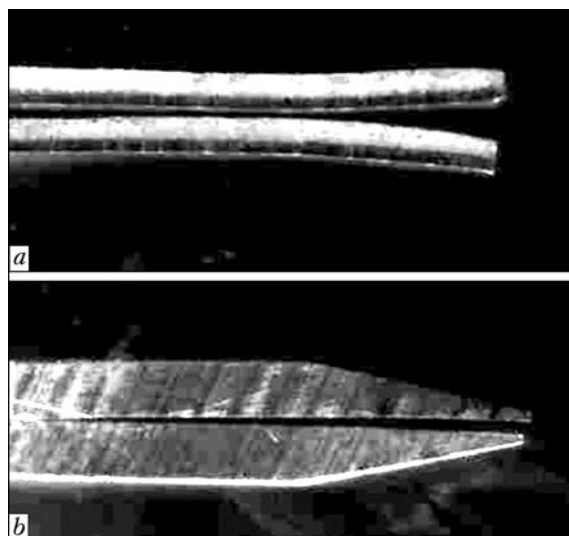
Appearances of specimens after mechanical tensile tests: a – traditional specimens; b – beveled specimens
